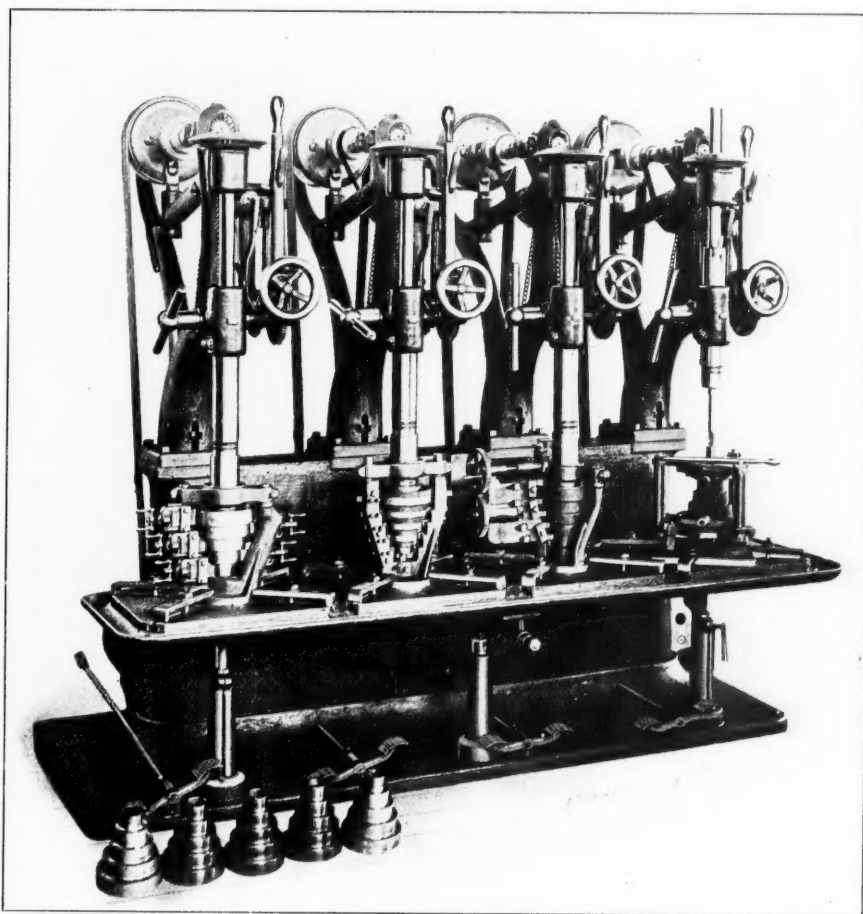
Set of Tools used on Gang Drill for Boring and Turning Cone Pulleys.
